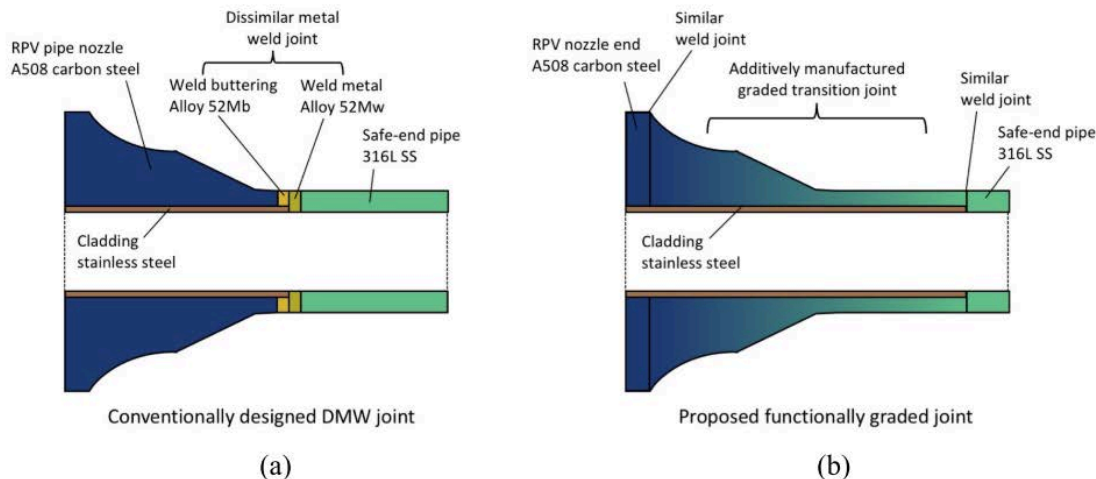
(a) Cross section of a dissimilar weld joining (carbon steel nozzle with austenitic stainless steel). (b) Solution using functionally graded joints [171].
